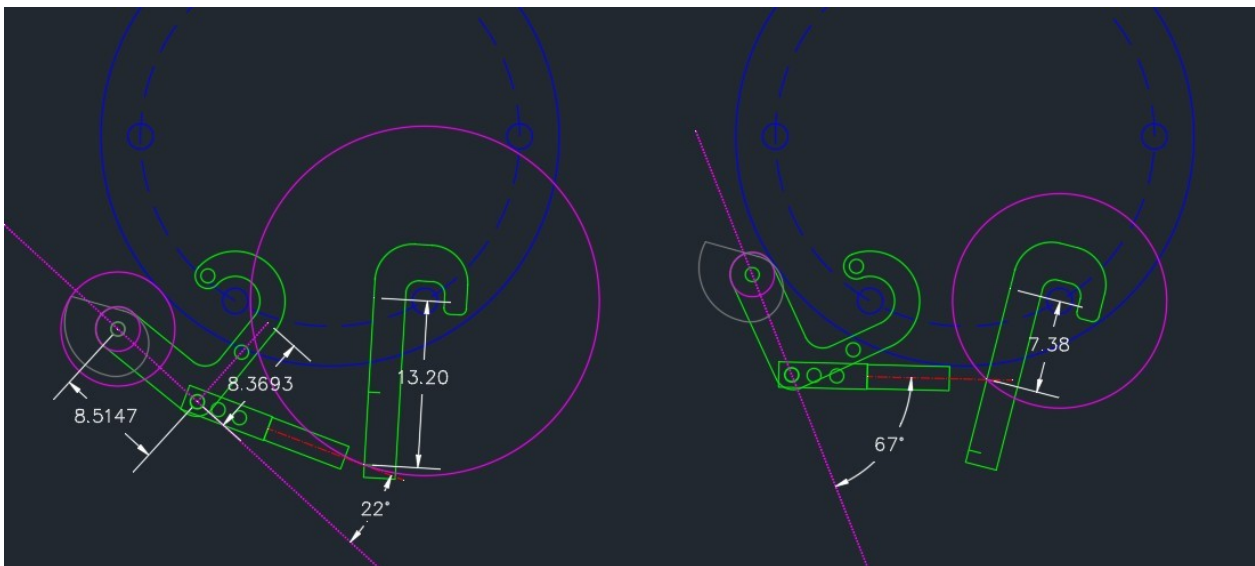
CADD model of Millerbernd wrench geometry and operations
